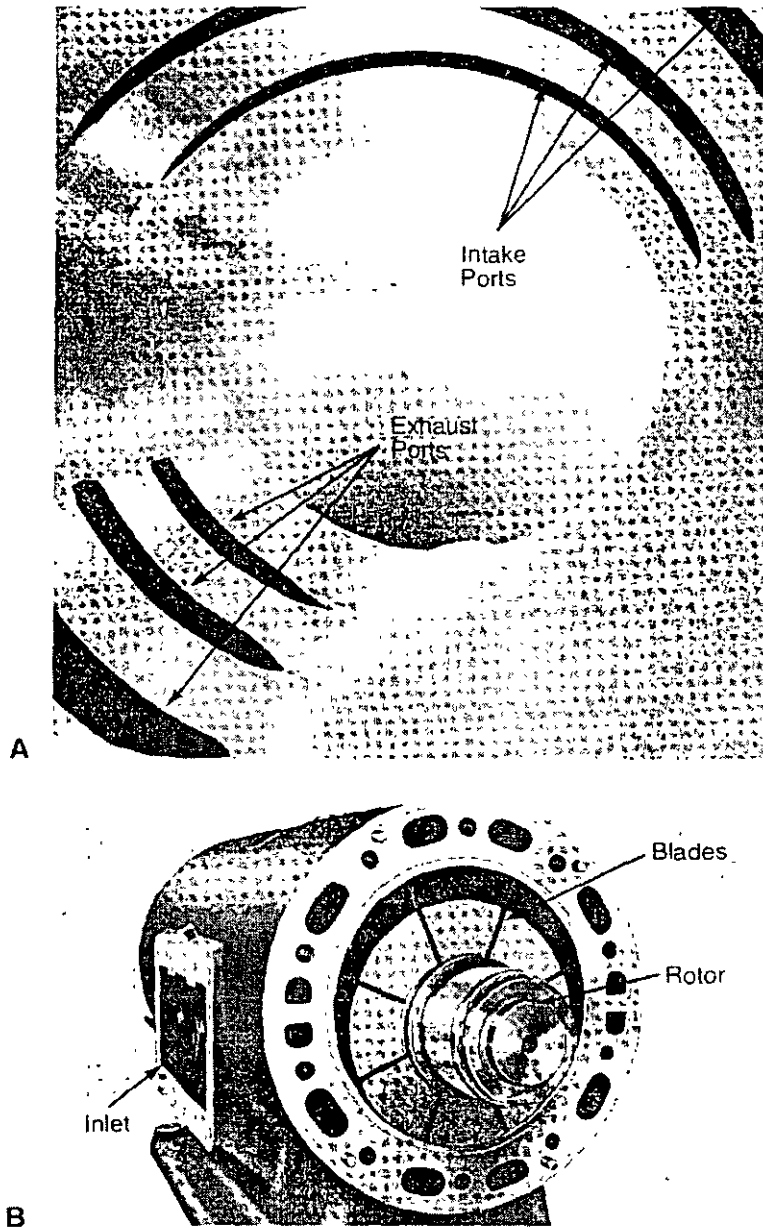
Detail of cylinder and rotor shown in Figure 4-54. A—The inside of the cylinder showing port openings. Note that the intake ports are longer than the exhaust ports. B—Relative position of rotor and blades inside cylinder.
